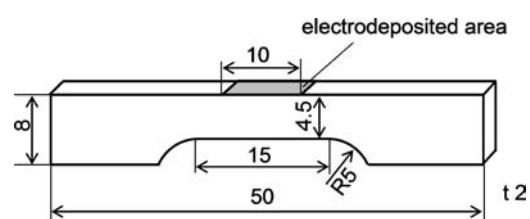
Shape and dimension of the strip specimen, where a side surface is coated with the Ni/Cu multi-layer.
